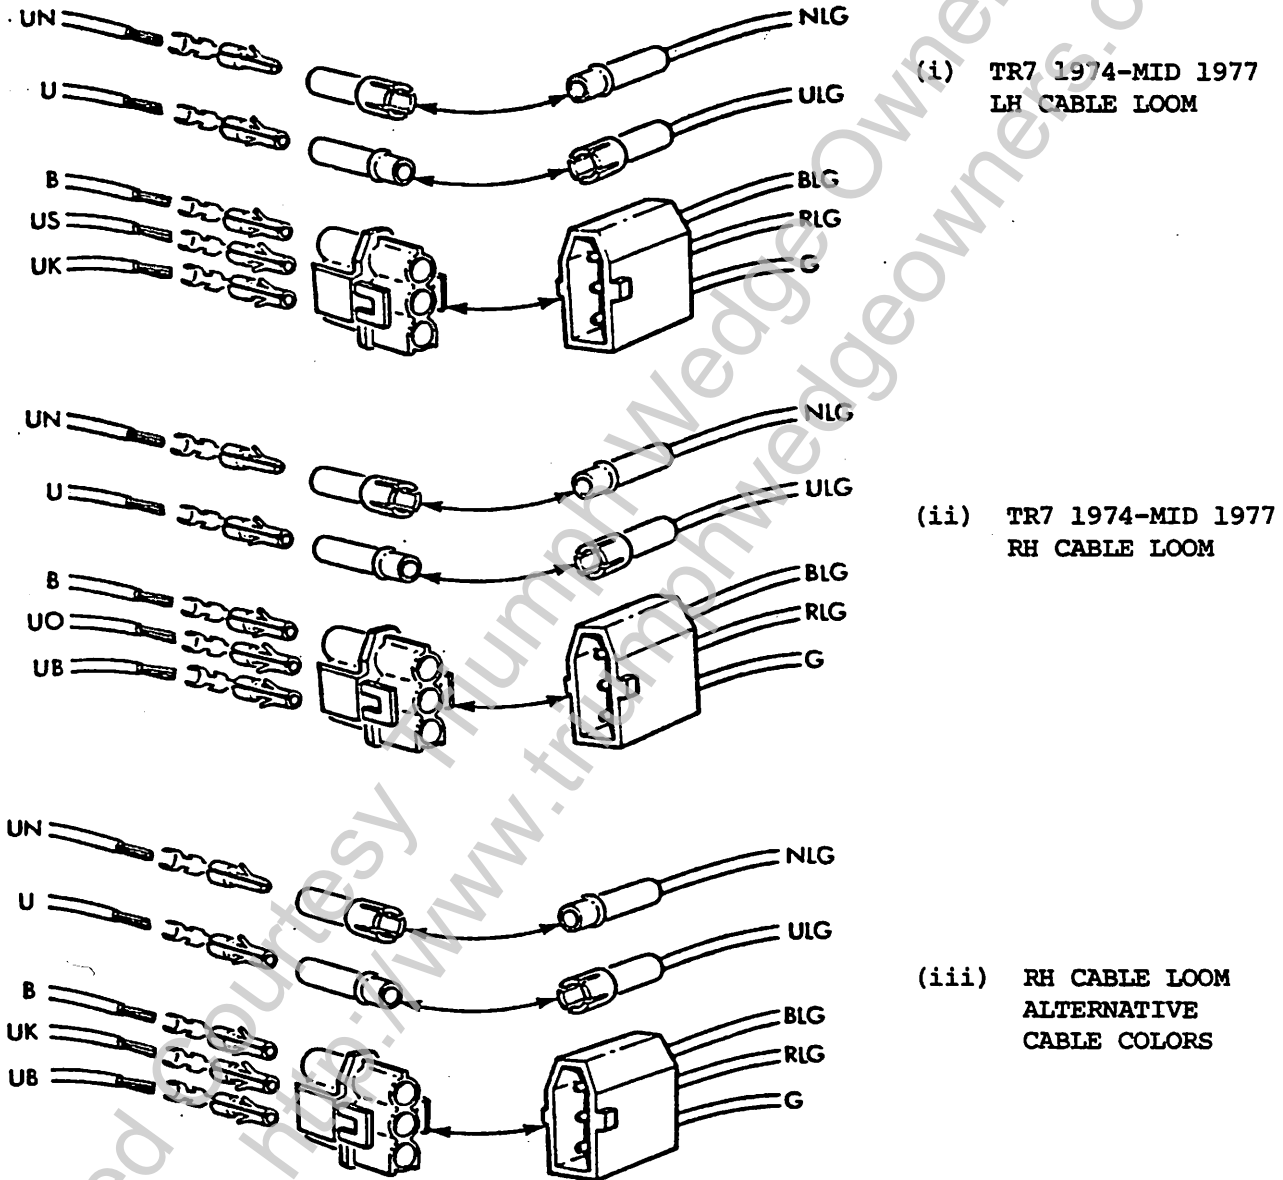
ALTERNATIVE WIRING CONNECTIONS. CABLE COLOR CODE
